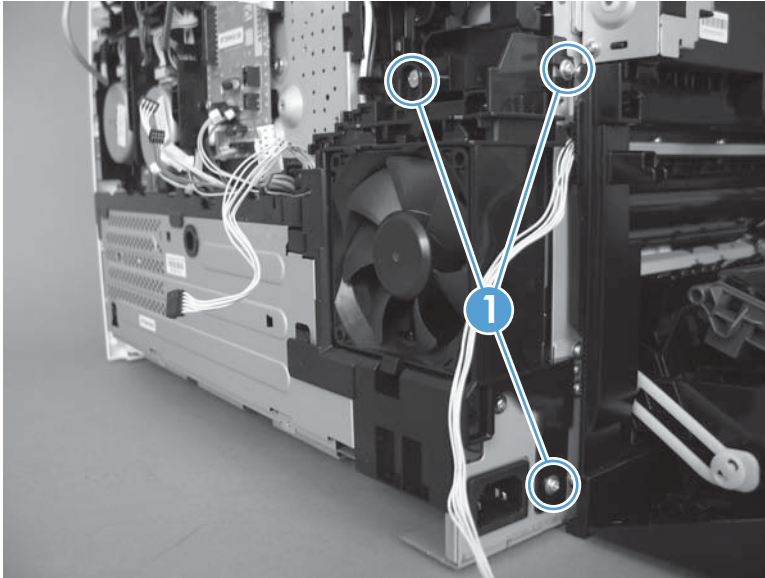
Remove the fuser-motor assembly (1 of 6)
